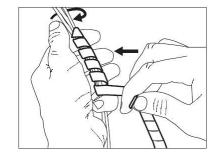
, SPIRAP HAND TOOL INSTRUCTIONS (included with each tool)
